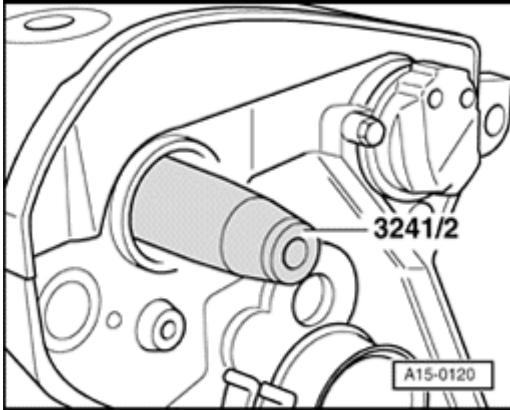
Installing Guide Sleeve 3241/2 Onto Camshaft Journal
